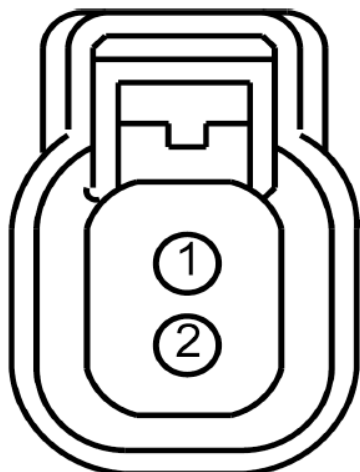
Left Front Wheel Speed Sensor Connector End View (C150)
